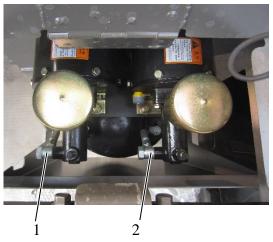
1 To-front axle oil pipe 2 To-rear axle oil pipe
